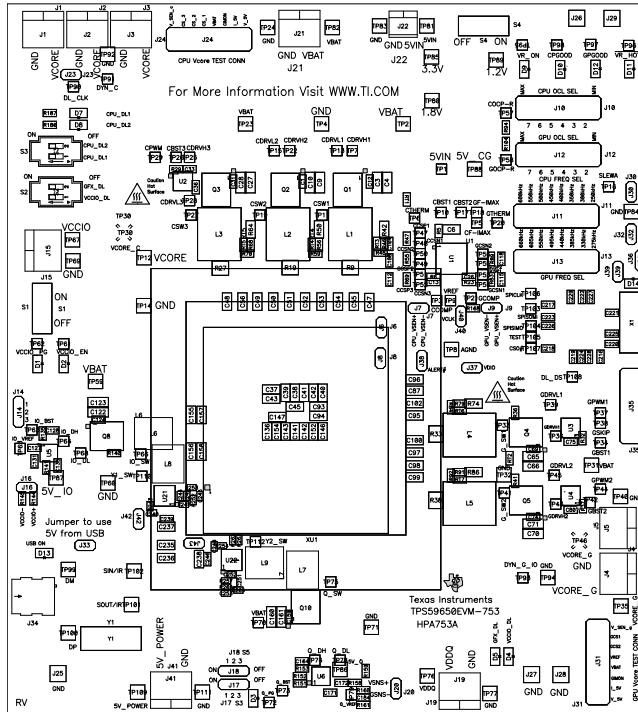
TPS59650EVM-753 Top Layer Assembly Drawing (Top view)
